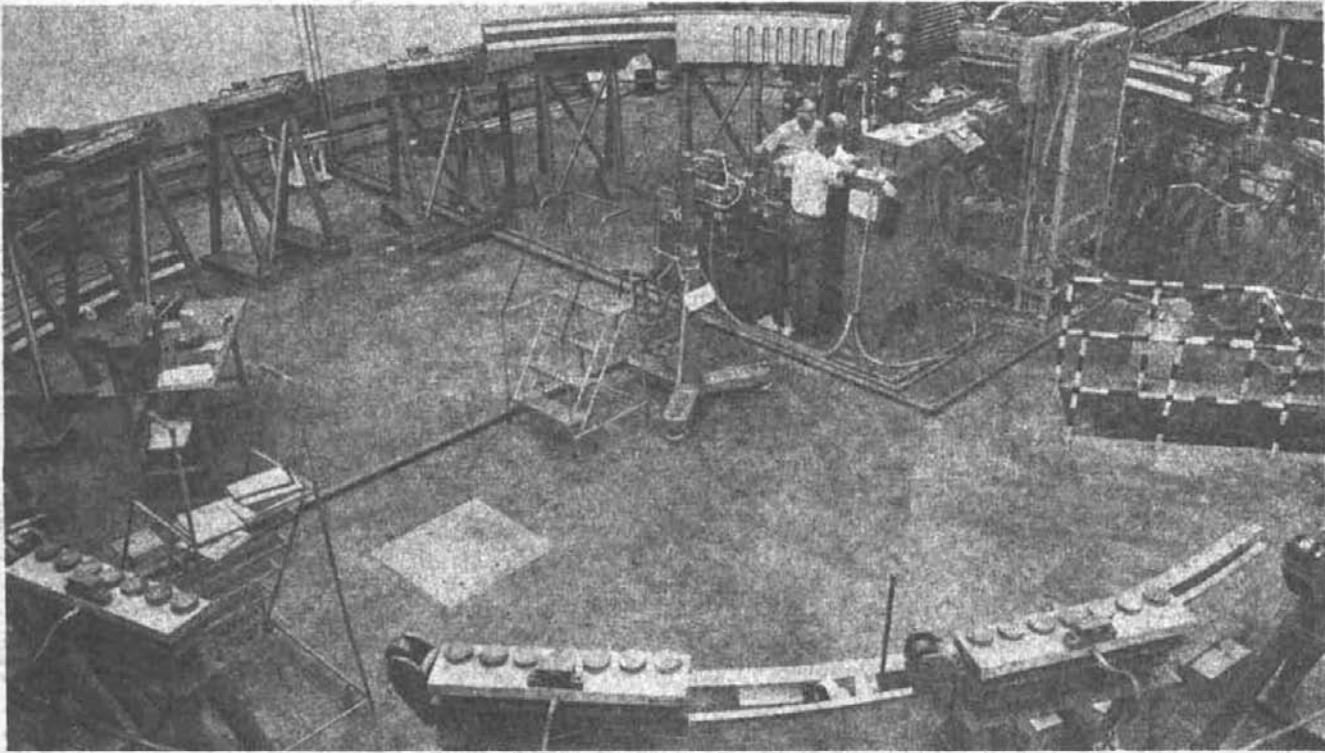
FIXTURE FOR POCKET MILLING Y-RINGS
